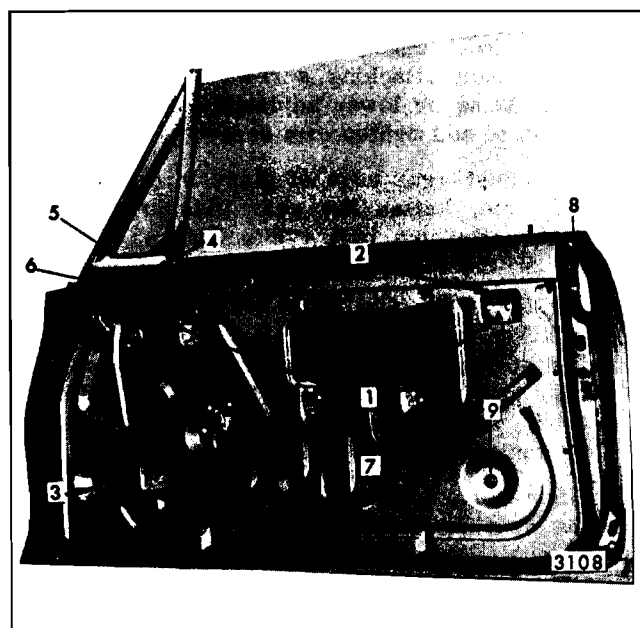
Door Window Removal and Adjustment - "Z" Styles
